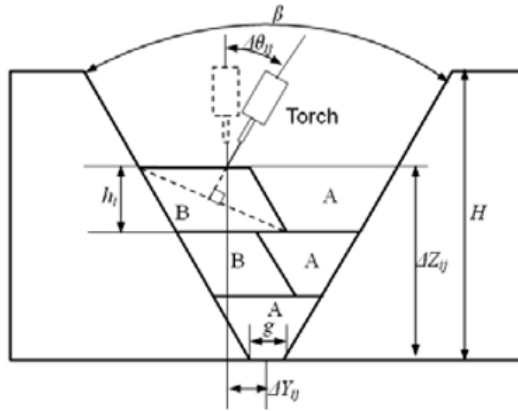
Section shape of multiple pass welding seam, Zhang et al. (2011)
